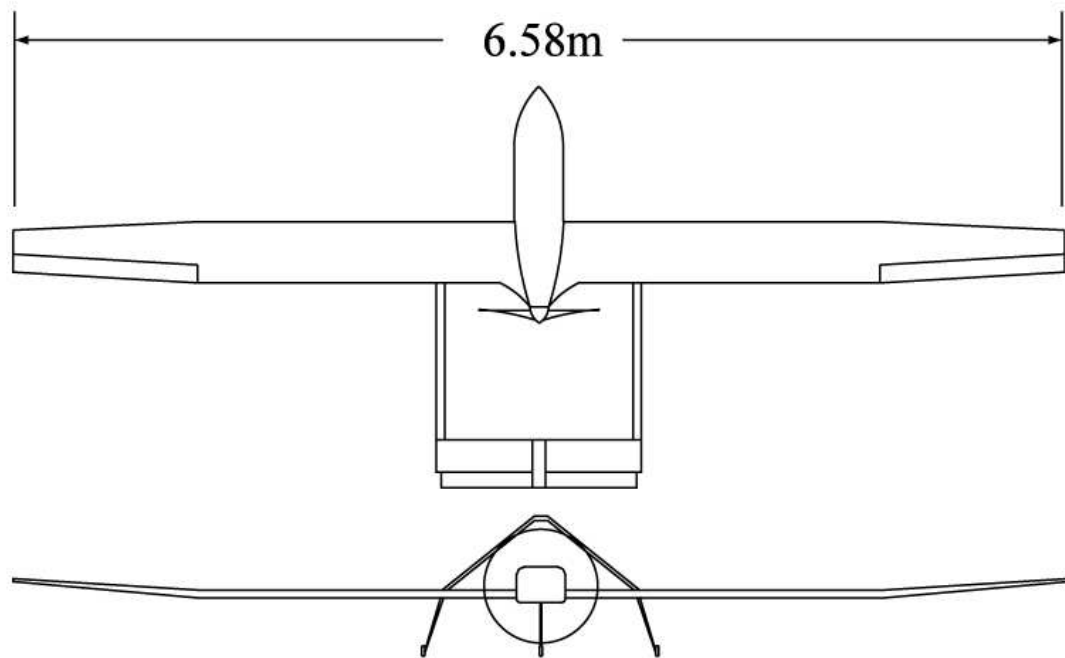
Two view drawing of fuel cell powered demonstrator aircraft
